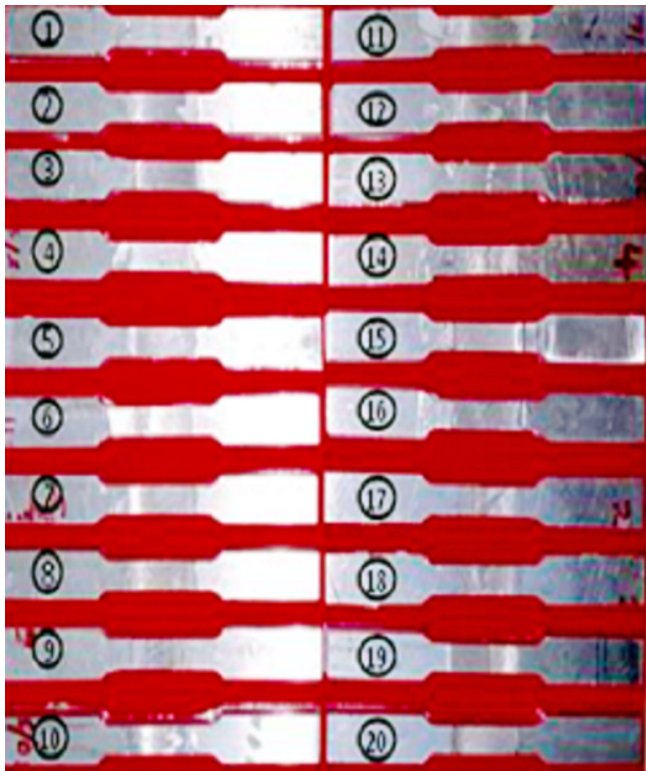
Typical set of tensile specimens extracted from the welded joints
